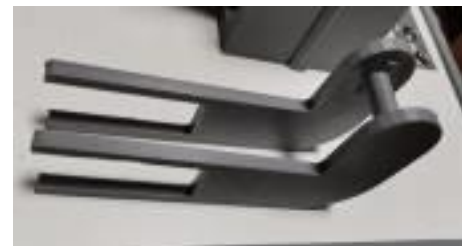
3D-printed spool holder with integrated gear ring
